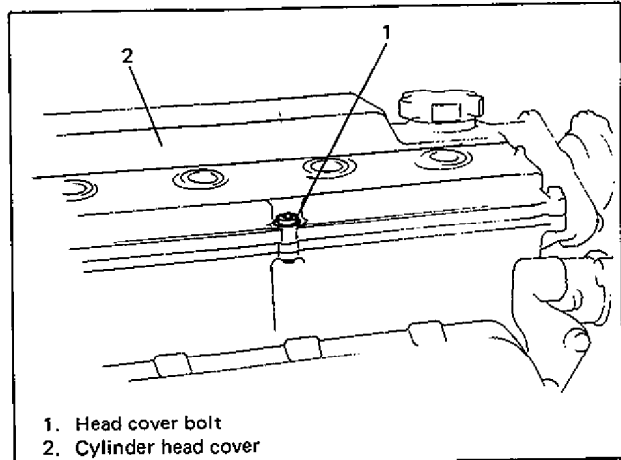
A-15 Removing Cylinder Head Cover Bolt
